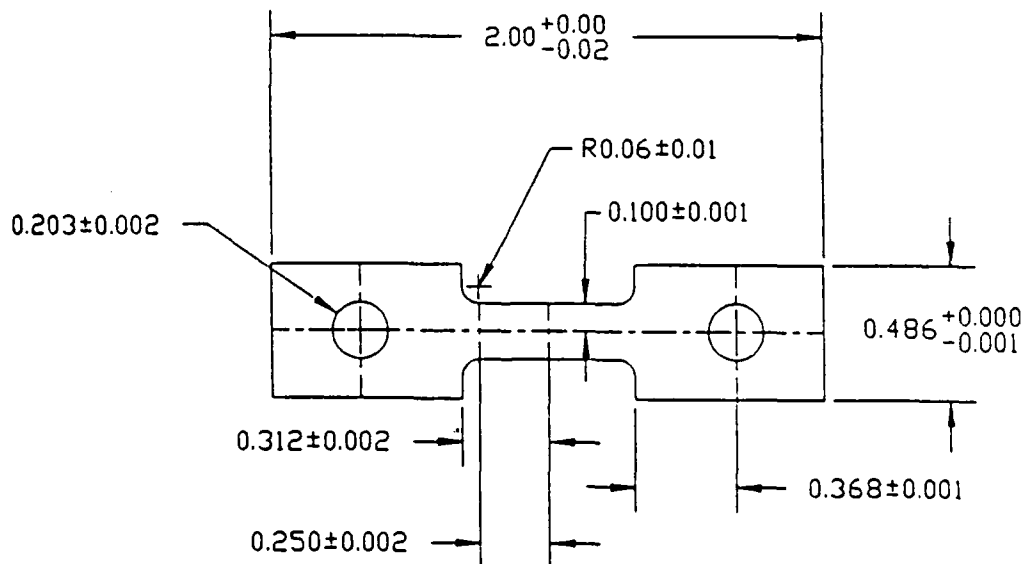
Tensile Test Specimen Design : dimensions and tolerances are in inches.
